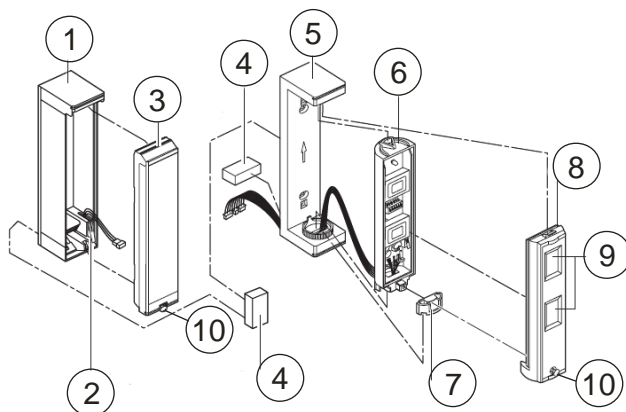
Detector parts: 1 – Transmitter plastic part, 2 – tamper contact for transmitter part, 3 – transmitter part cover, 4 – sealing sponge, 5 – rear detection part, 6 – detection part, 7 – pull-out sealing cover, 8 - detection part cover, 9 – lenses, 10 – locking screw for the detection and transmission part
